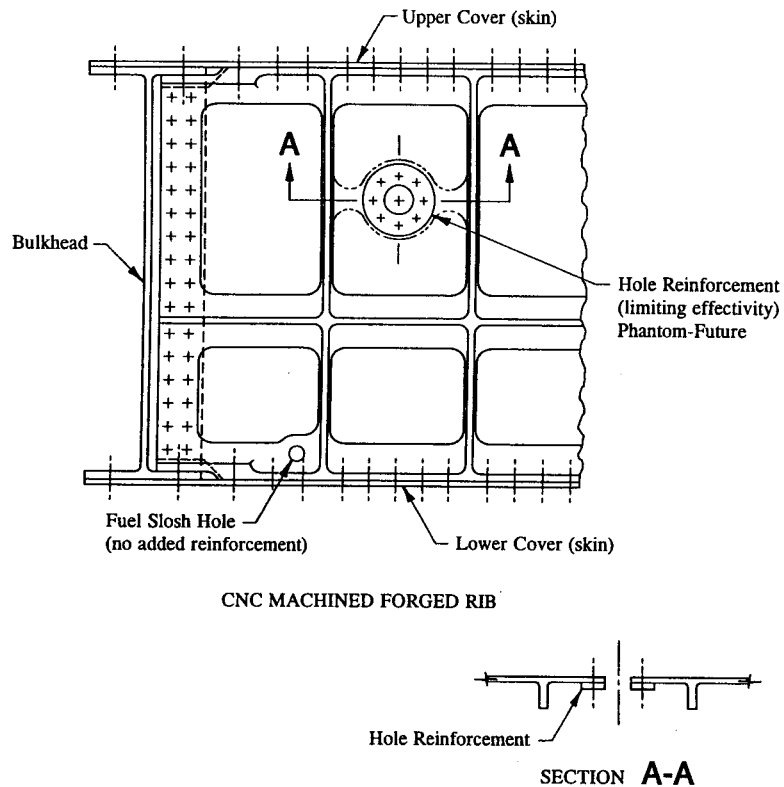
Riveted ring doubler in the web of a CNC machined forged rib.
